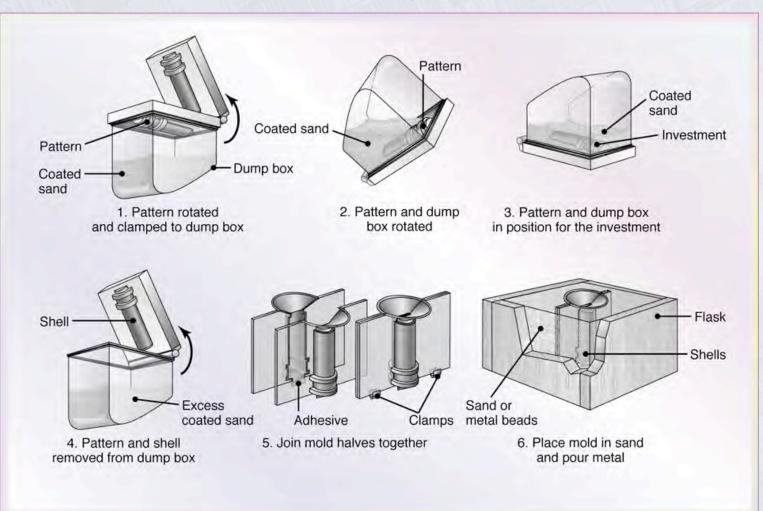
The shell-molding process, also called *dump-box* technique.
